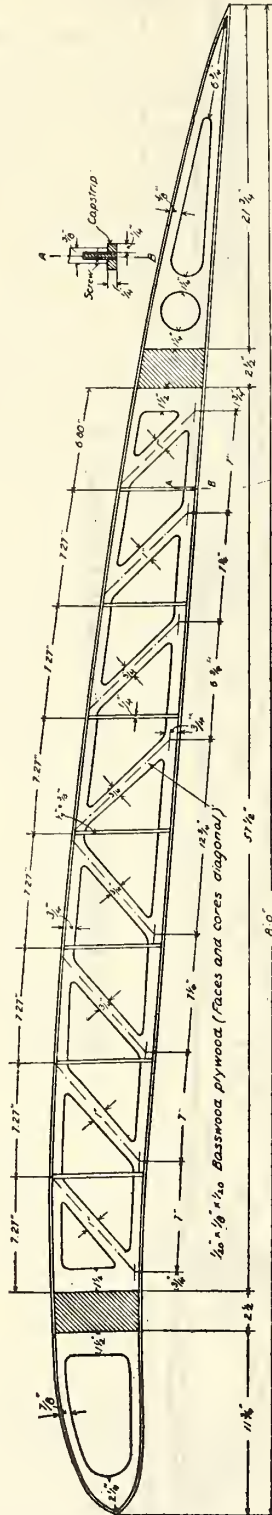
Plywood truss type wing rib for F5-L machine.
